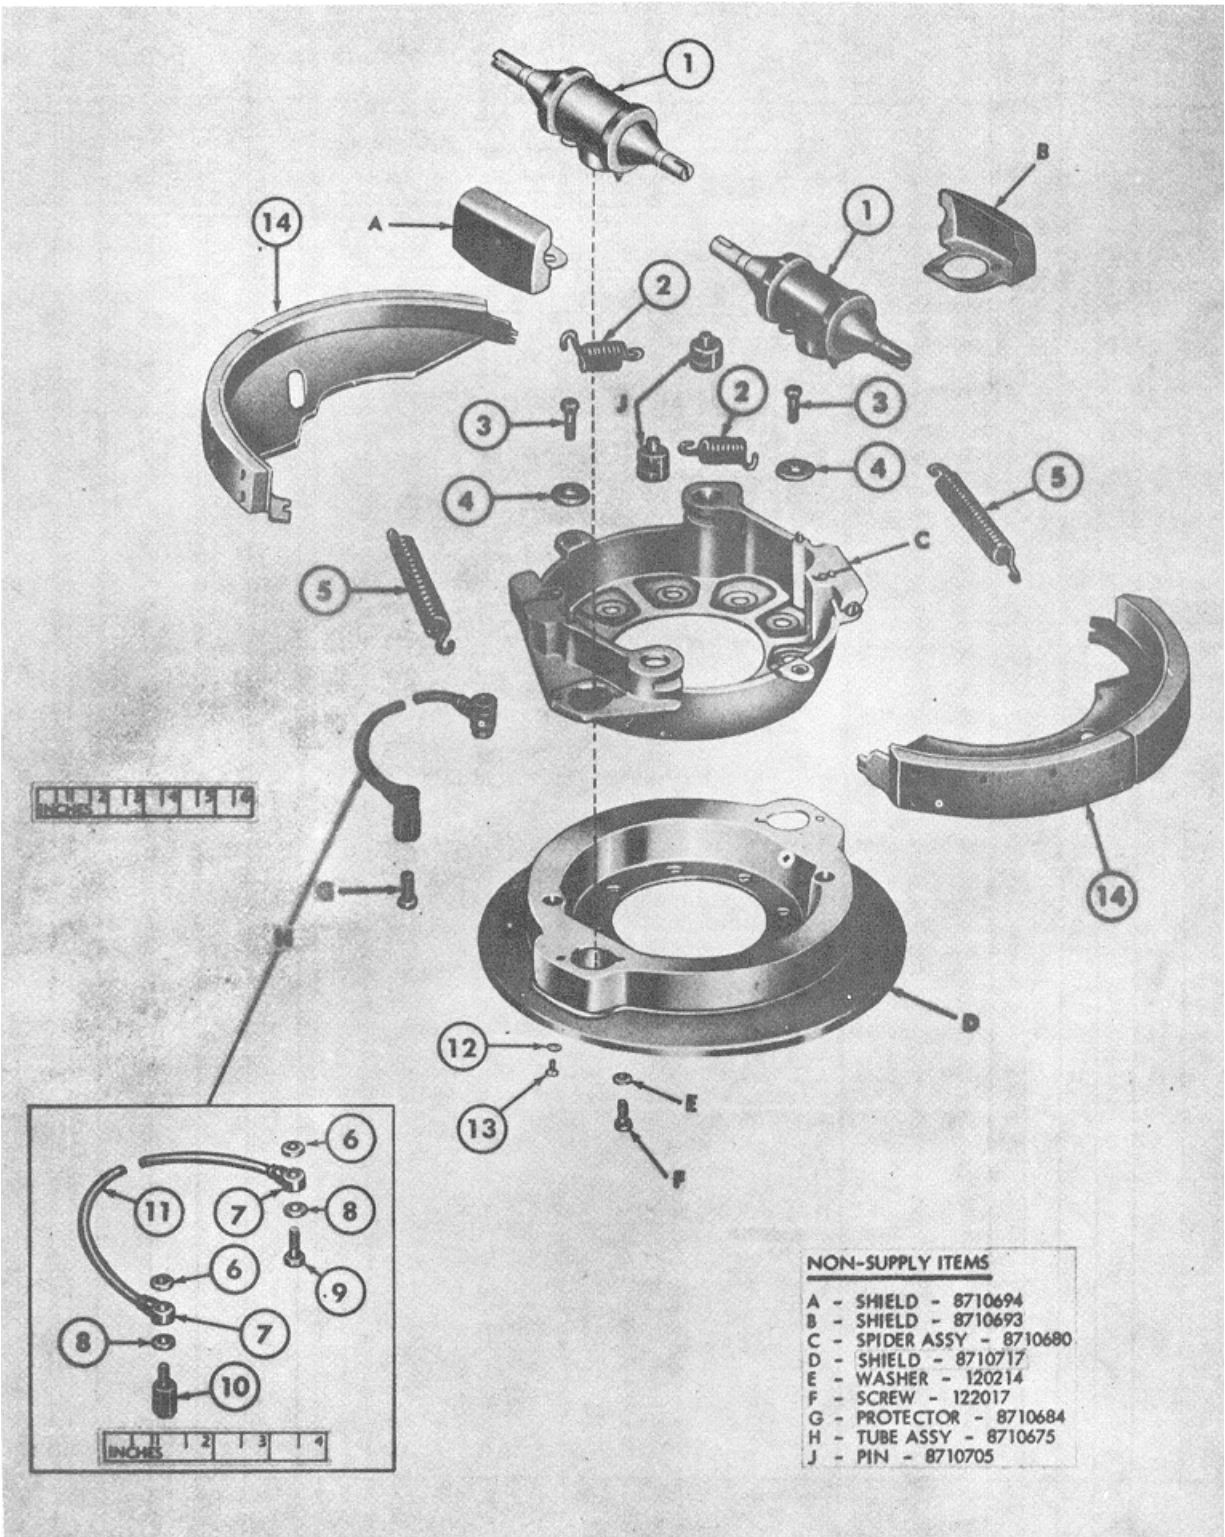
SERVICE BRAKE - EXPLODED VIEW.
